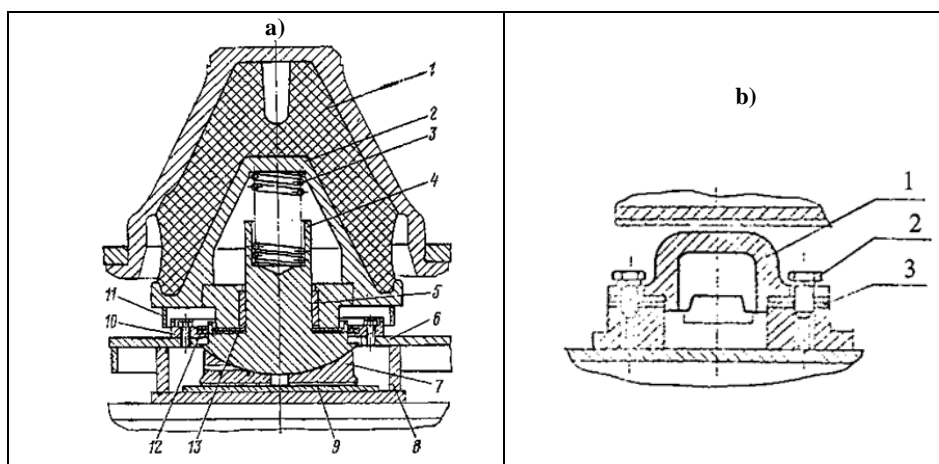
Body supports of the motor dumpcar: a) lateral support; b) auxiliary support
